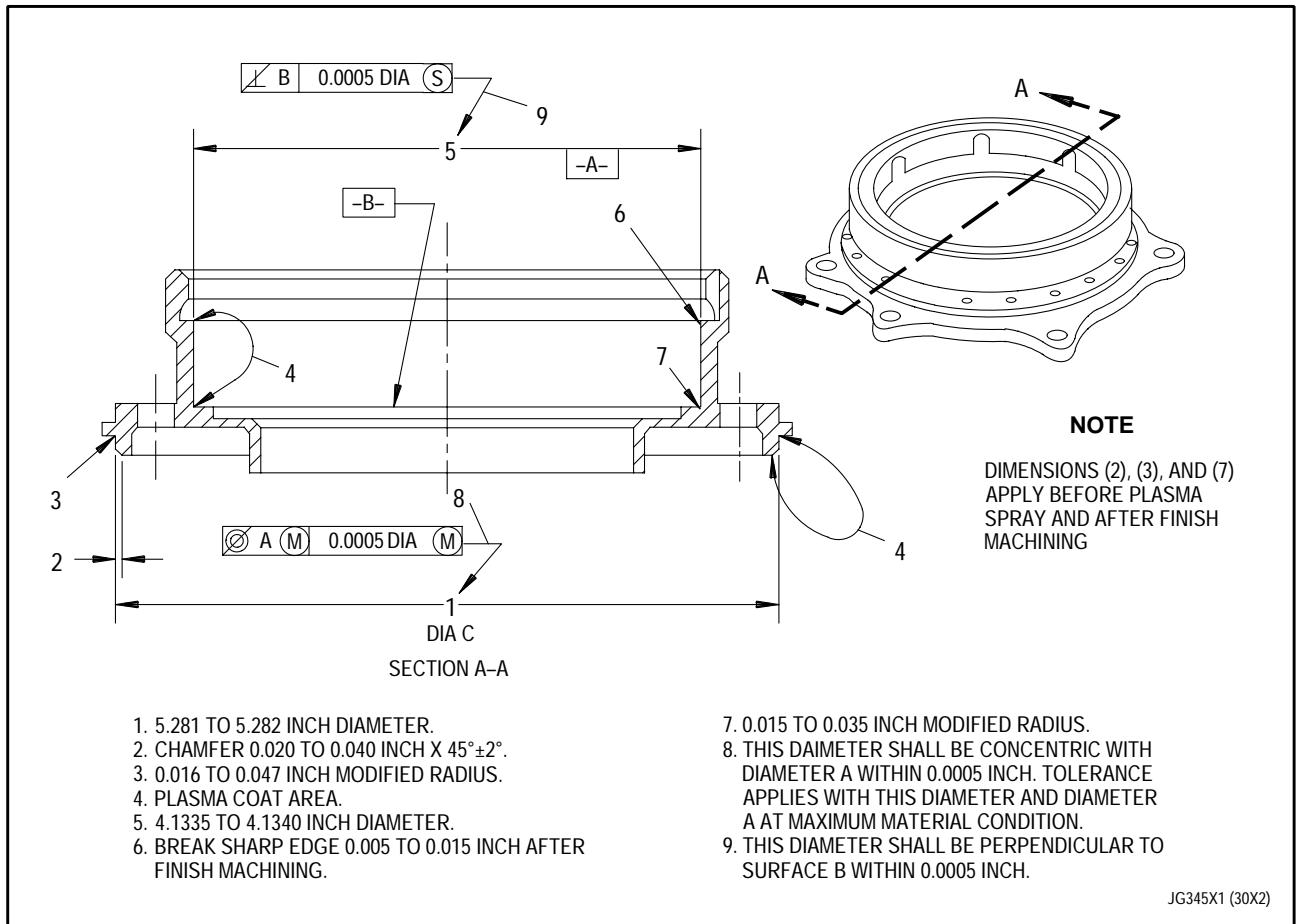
Gearbox Drive Bearing Housing - Snap Diameter Repair
